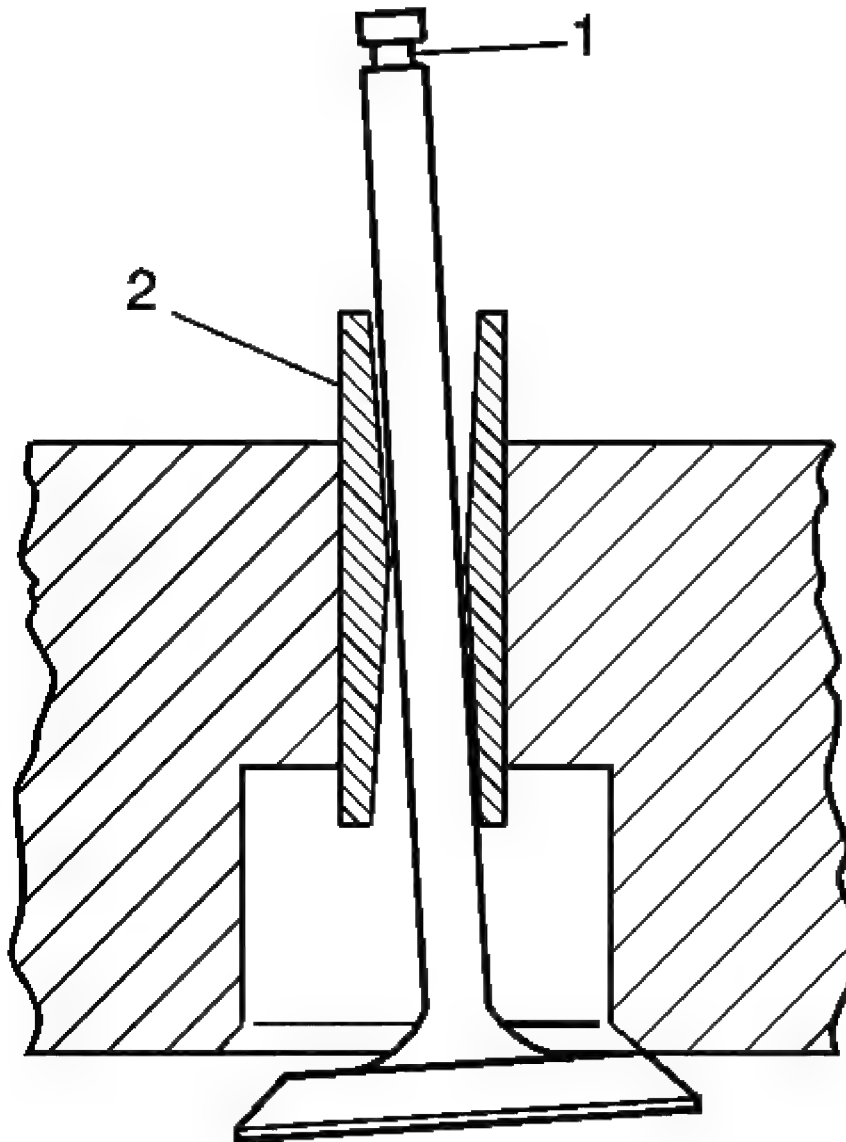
Inspecting For Excessive Valve Stem To Guide Clearance
